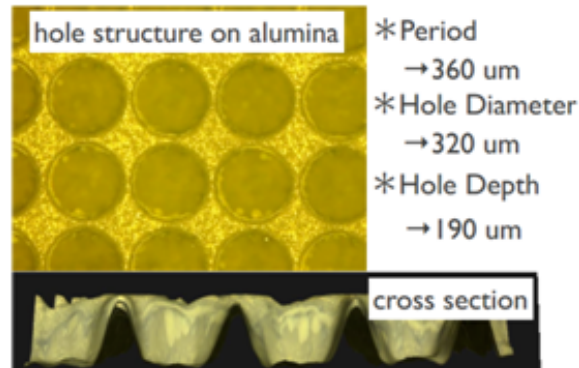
Dimples drilled in alumina with laser pulse [92]
